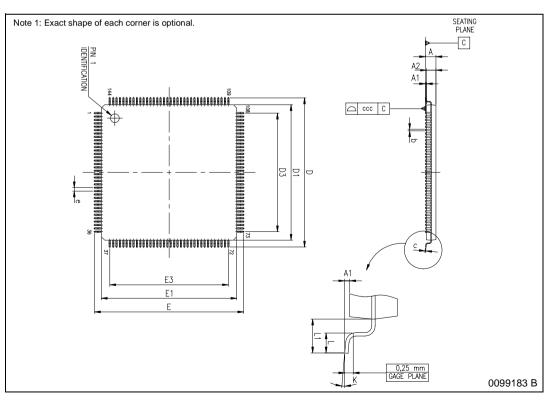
TQFP144 (20 x 20 x 1.4mm) Mechanical Data & Package Dimensions
